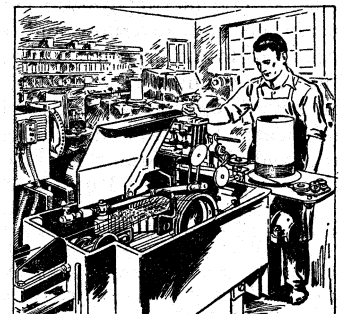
CONE TYPE CONTINUOUS WIRE-DRAWING MACHINE
